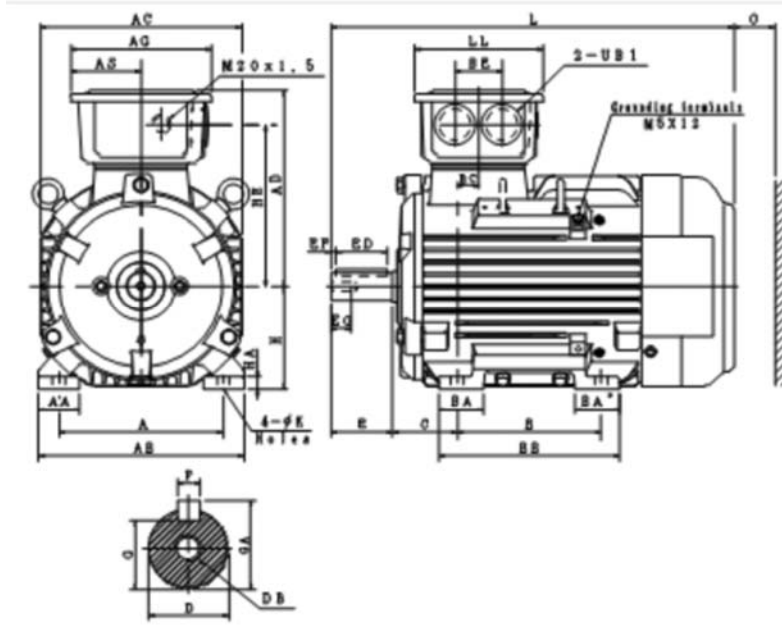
Outline drawing of cast iron design, feet version, mounting B3; frame size 80 – 112
